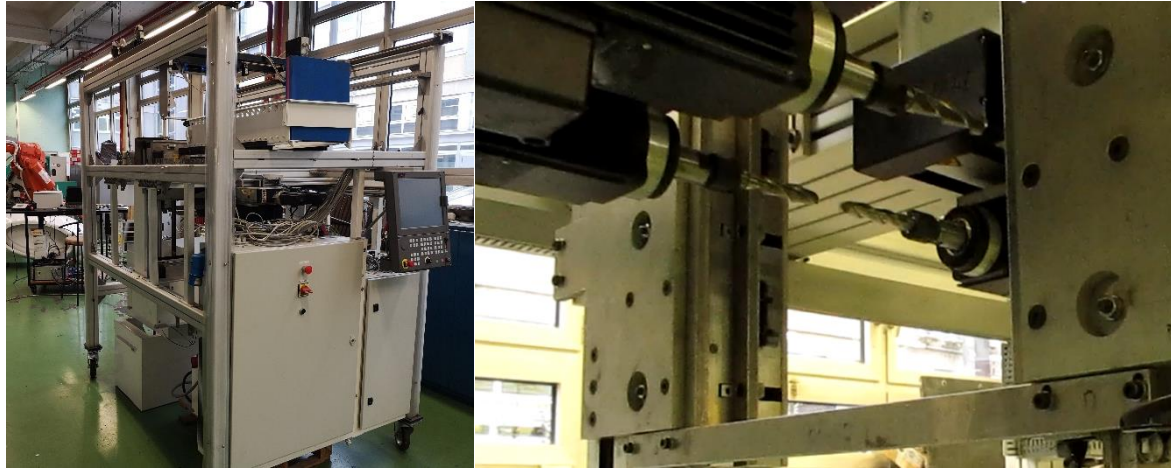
Left - realized IPASIOU machine; Right - machine's working space.
